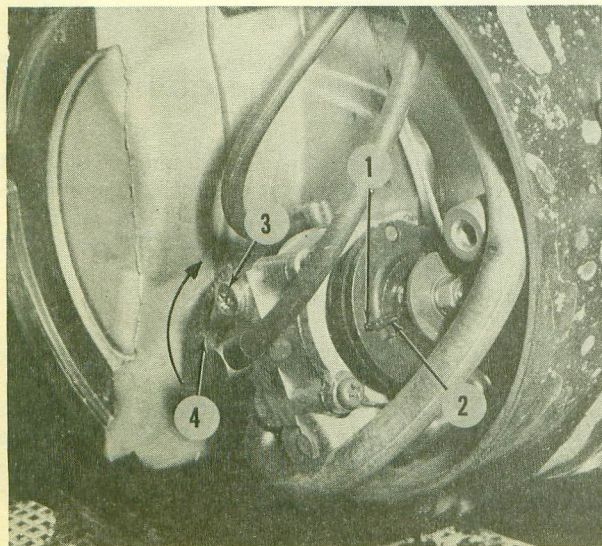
Adjust pump cable so that marks align as slack is just taken up in throttle cable.
